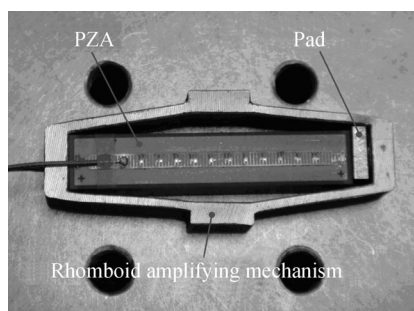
The assembly of the rhomboid amplifying mechanism with PZA
